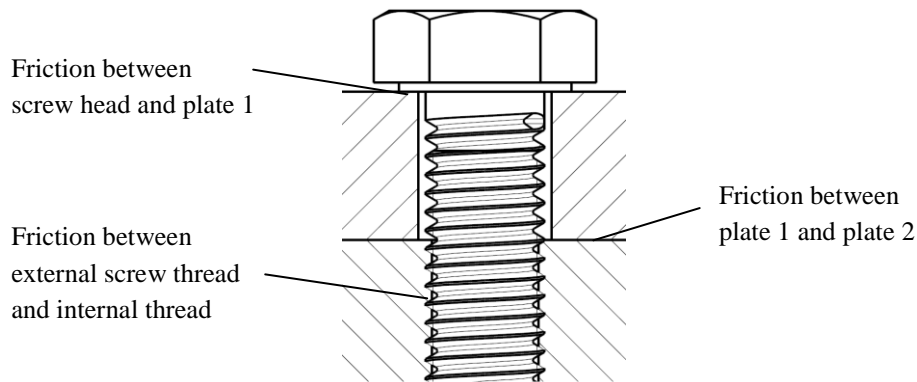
A hexagonal metric screw connects two parts. The thread is produced in several steps and the screw thread has flank clearance. The flank angle is  $60^\circ$ .
